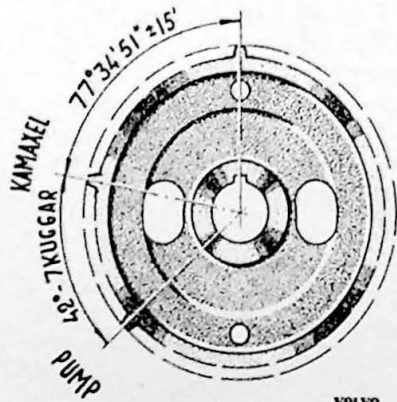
78. Camshaft gear and fuel injection pump drive gear.
